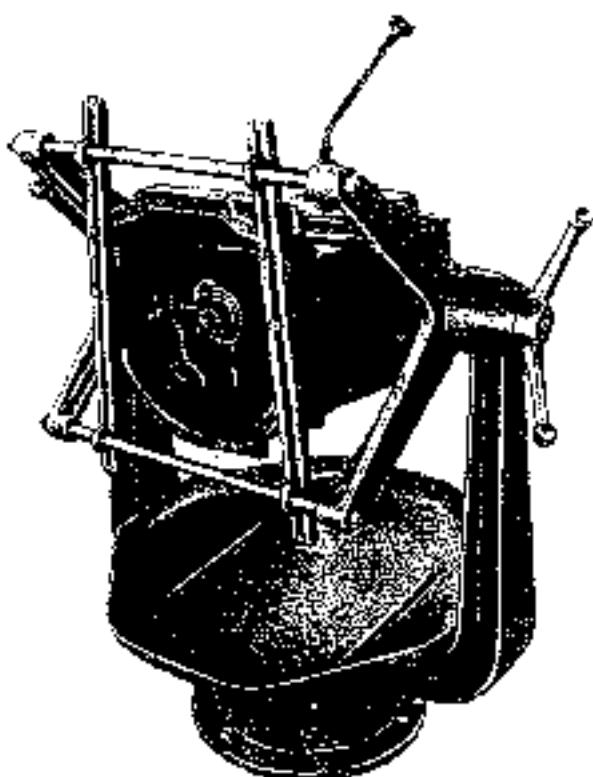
Gearbox casing mounted on rotary stand ARR 2204.
